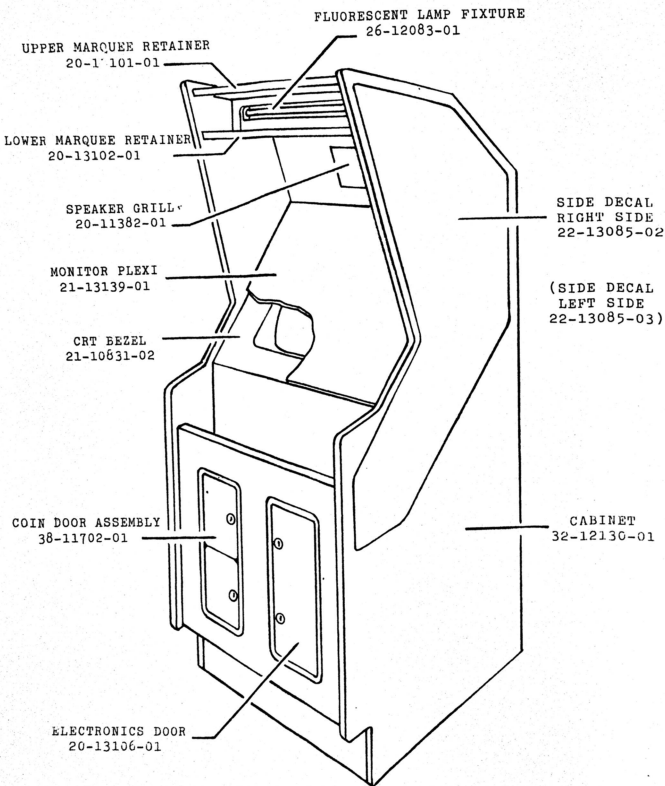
A: CINEMAT CABINET (FRONT VIEW)
